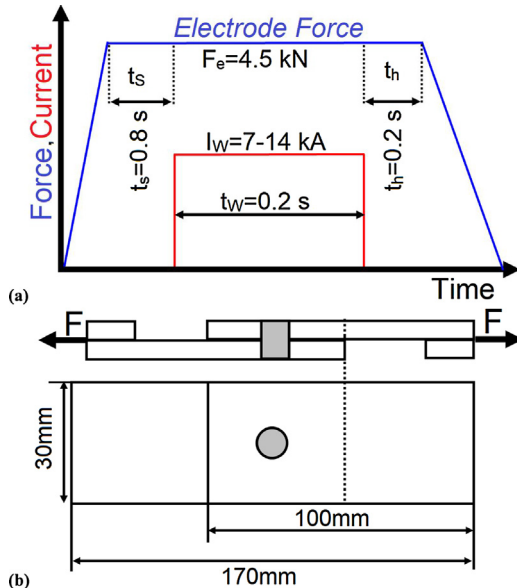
(a) Schedule of resistance spot welding used in this study for joining MS1200 martensitic steel sheets, (b) schematic of tensile-shear samples.
